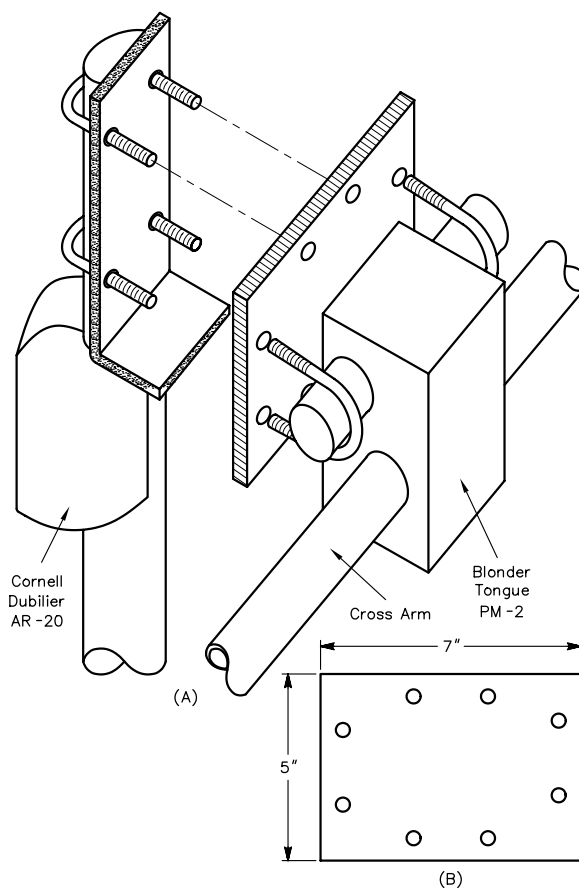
The method of mounting two rotators together. A pair of PM-2 rotators may also be used. The adapter plate (B) may be fabricated from $\frac{1}{4}$ -inch thick aluminum stock, or a ready made plate is available from Blonder-Tongue.
